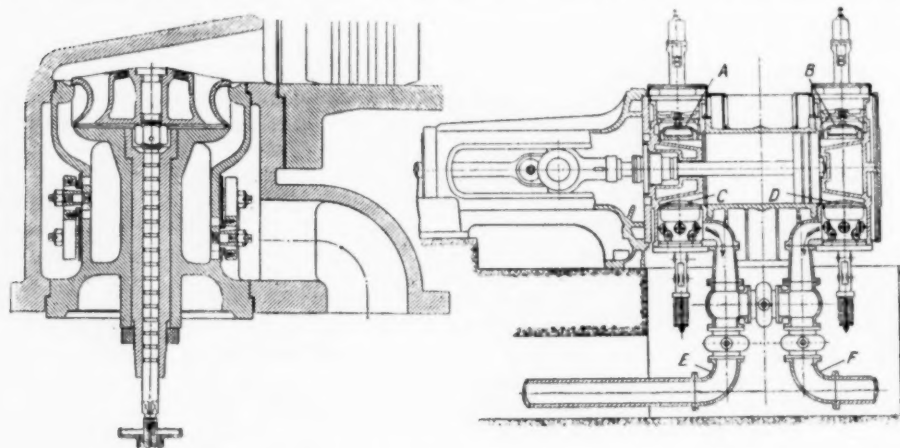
SECTION THROUGH ENGINE CYLINDER OF AN ATLAS PASS-OUT ENGINE
